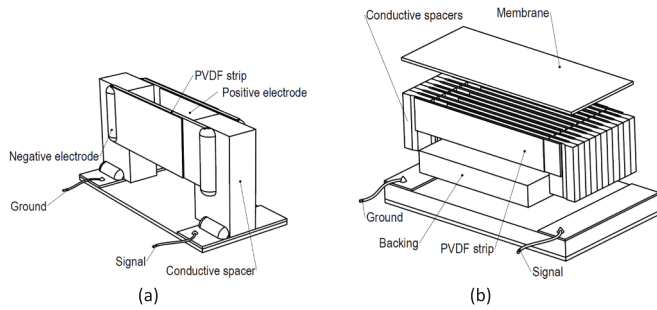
Second type PVDF-array transducer: intermediate assembly stage (a), and exploded view of final construction (b).
